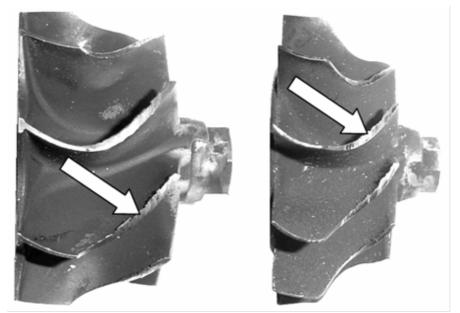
Turbines rotors damaged by contact with the housing as a result of too big clearance in the bearing
